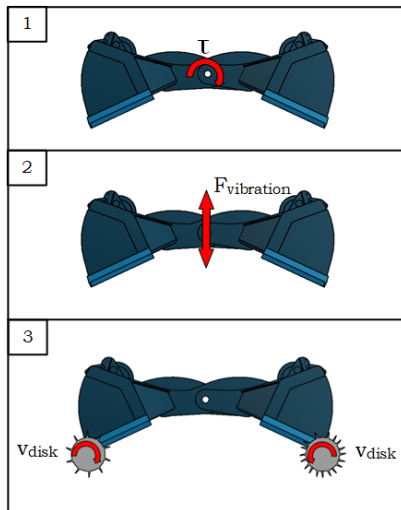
Overview of test plan for selected additional closing mechanism (I) adding extra torque, (II) vibration and (III) excavation
